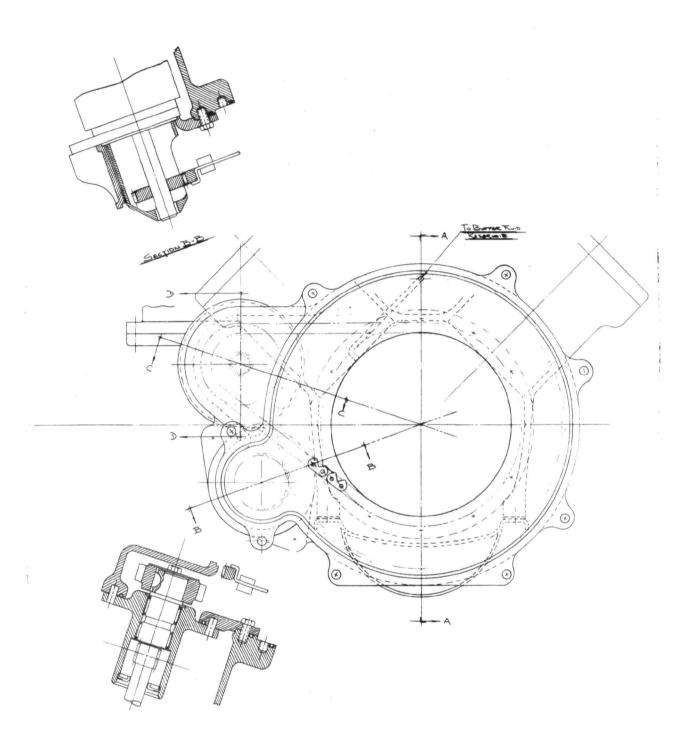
Expander Layout - Rear View Showing Accessory Drive.
